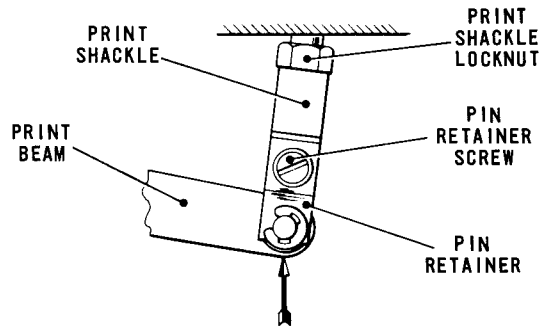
PRINT BEAM/PRINT SHACKLE LINKAGE
